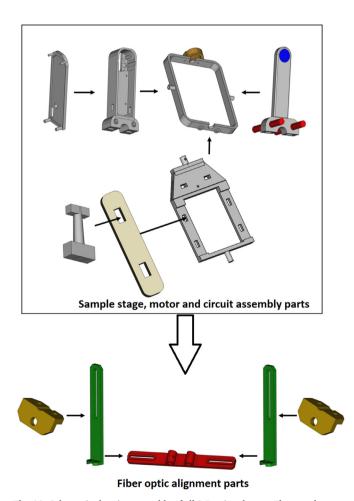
Schematic showing assembly of all 3-D printed parts. The sample stage, motor and circuit assembly parts were constructed before joining them to the supporting fiber optic alignment components.
